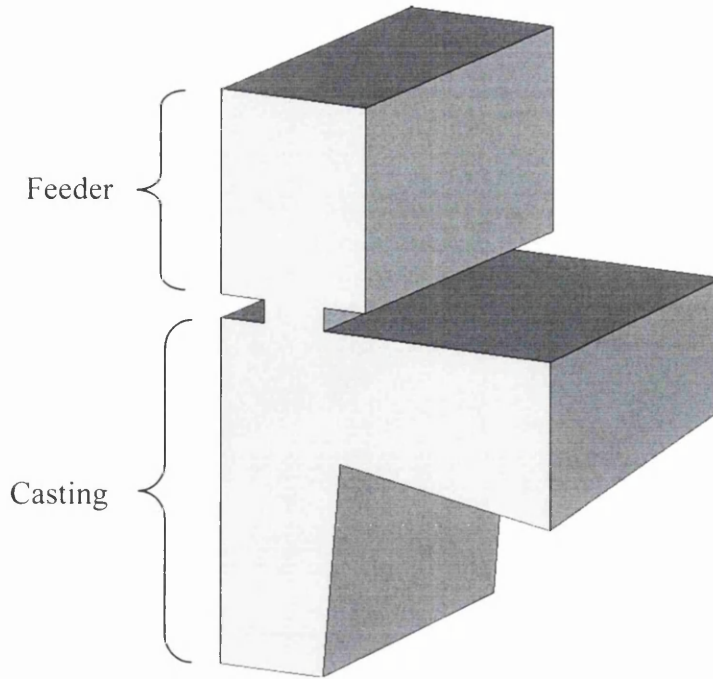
Three-dimensional body of the L-shaped casting created using CADfix
